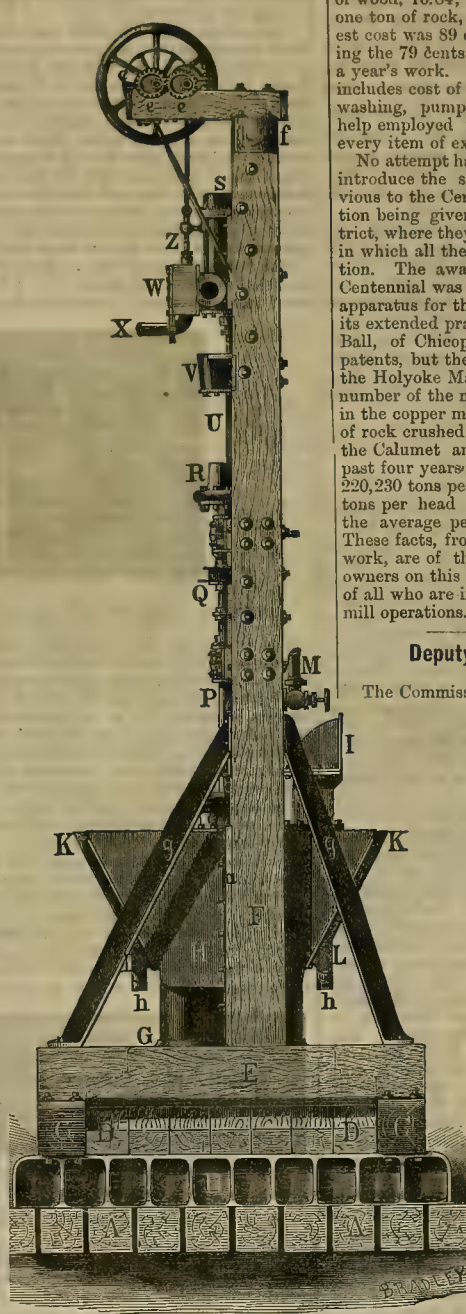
SIDE SECTION OF BALL STEAM STAMP.
